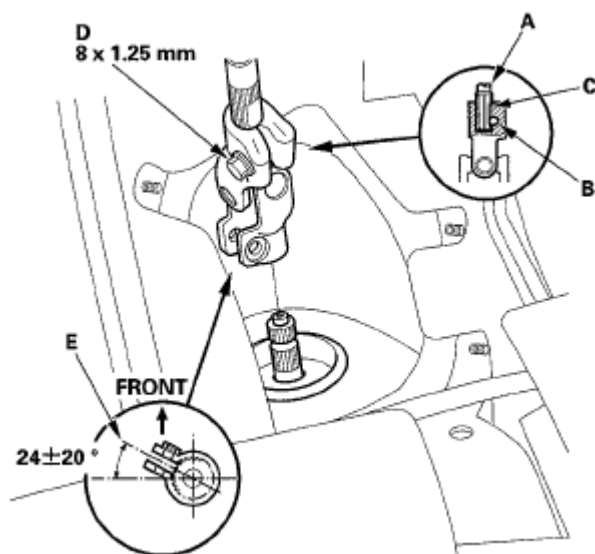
Identifying Upper End Of Steering Joint Onto Steering Shaft
